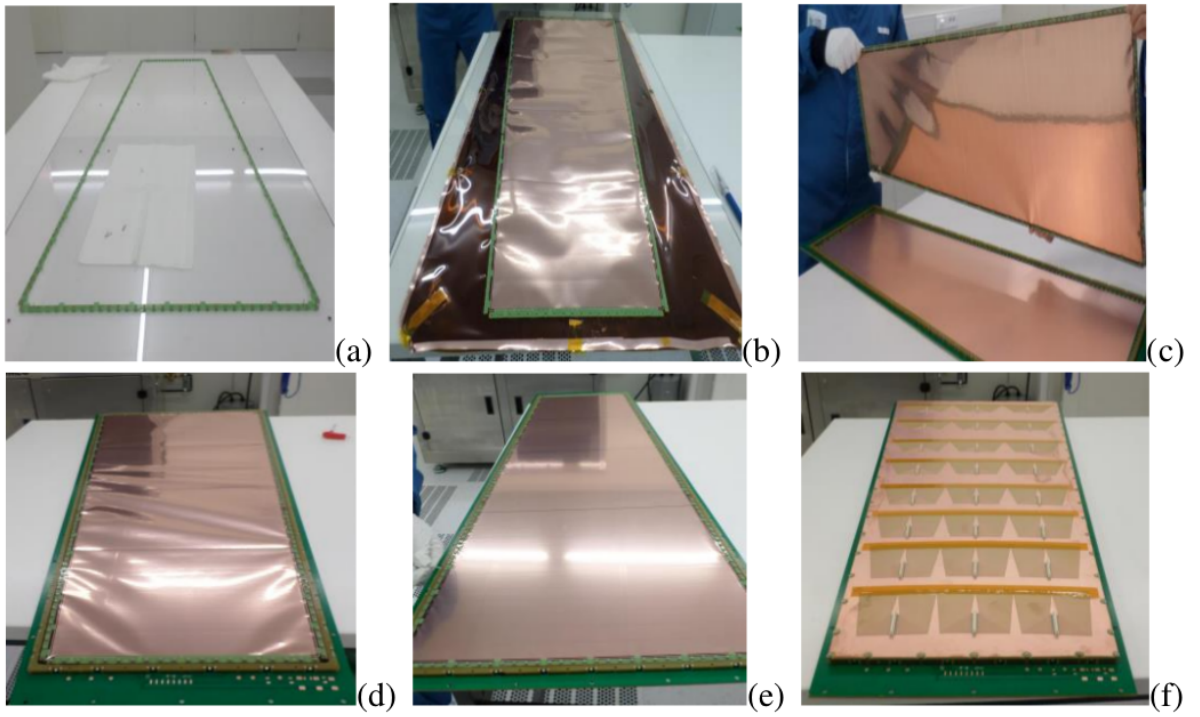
The GE1/1 prototype assembled in Ghent University. Mounting inner frames (a), assembling three GEM foils (b), inserting GEM stack (c), stretching foils with tension (d), stretching foils with frames (e), mounting readout board (f).
